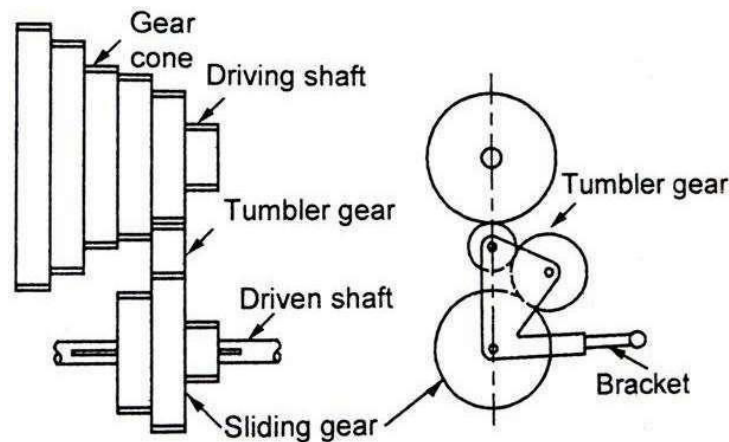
shows the schematic arrangement of tumbler gear quick-change gear box.
